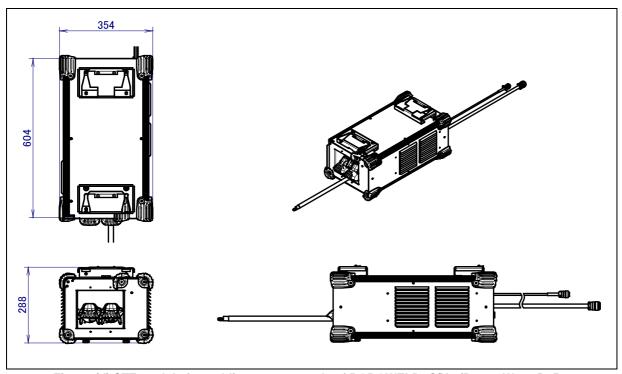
(d) STT module for welding power supply of ROBOWELD $i\mathrm{C/H3}$ (Power Wave R350)
